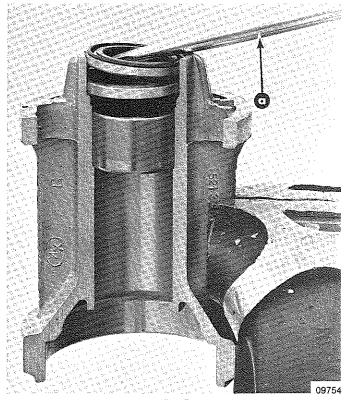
Removing Reverse Gear and Bearing from Bearing Carrier
